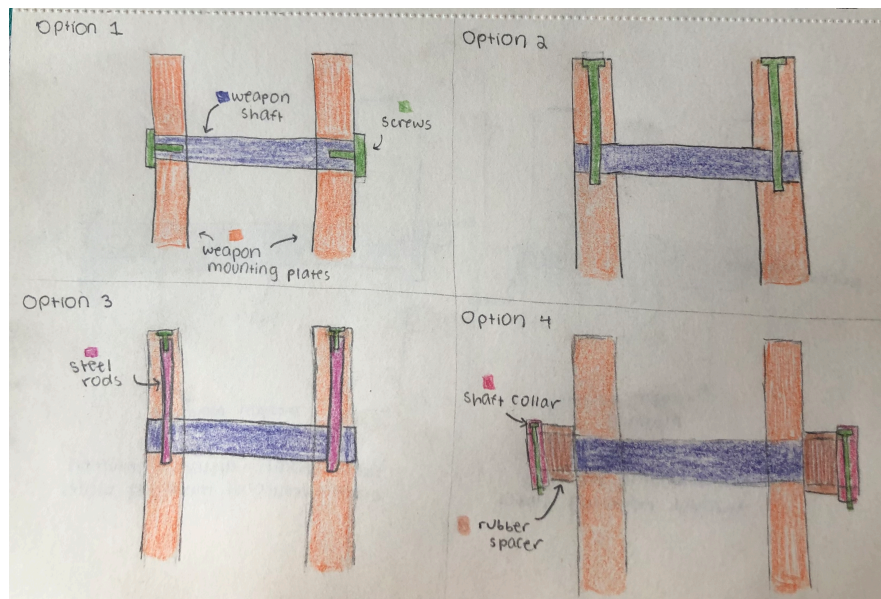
Sketches for four options to secure the weapon shaft to the weapon mounting plates.
